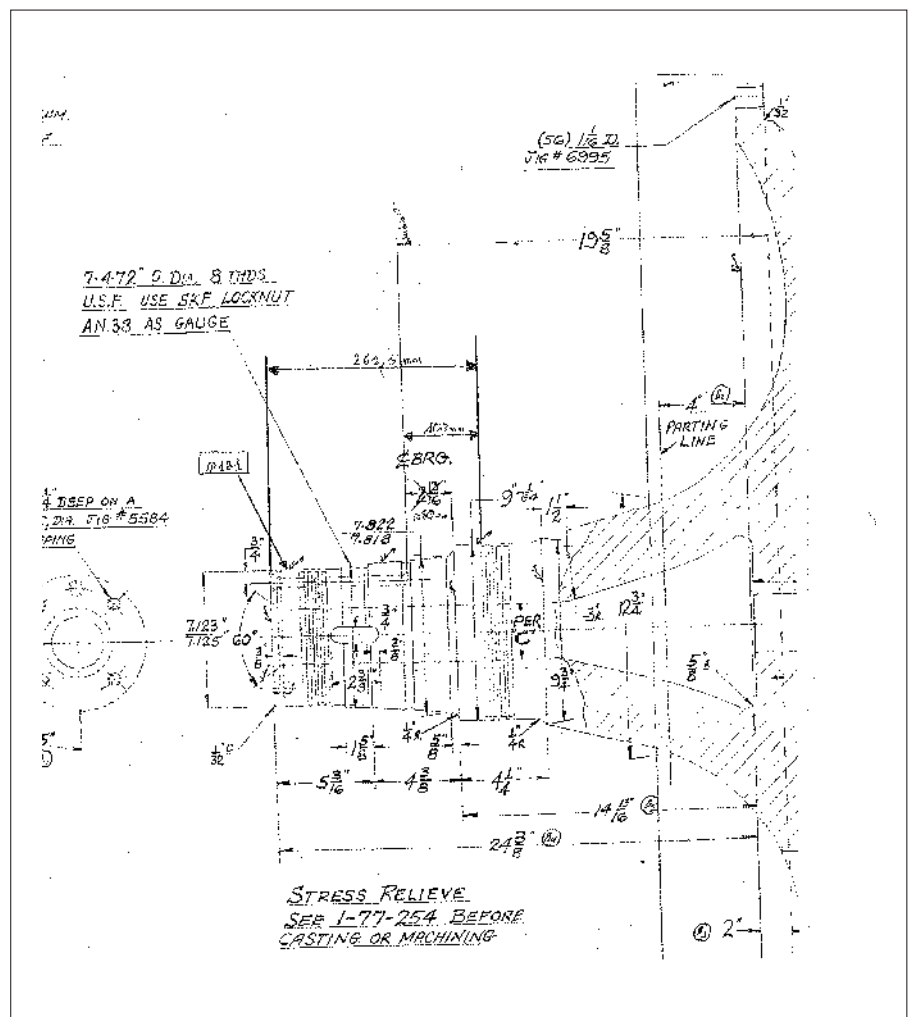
detailed drawing of journal, old drying cylinder on Beloit paper machine
